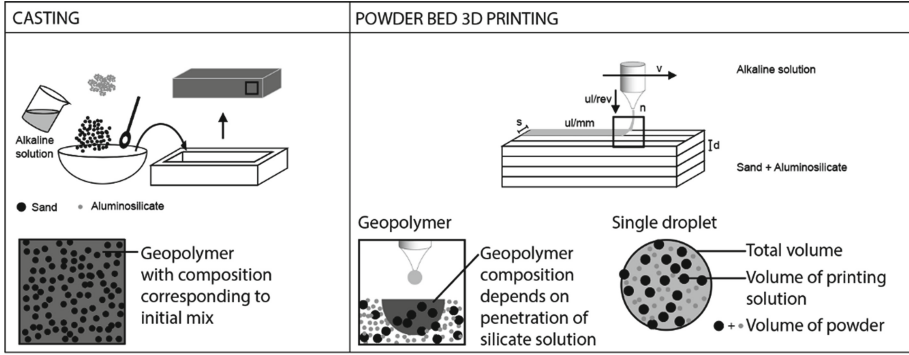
Comparison between mix design for casting and binder jet 3D printing.
